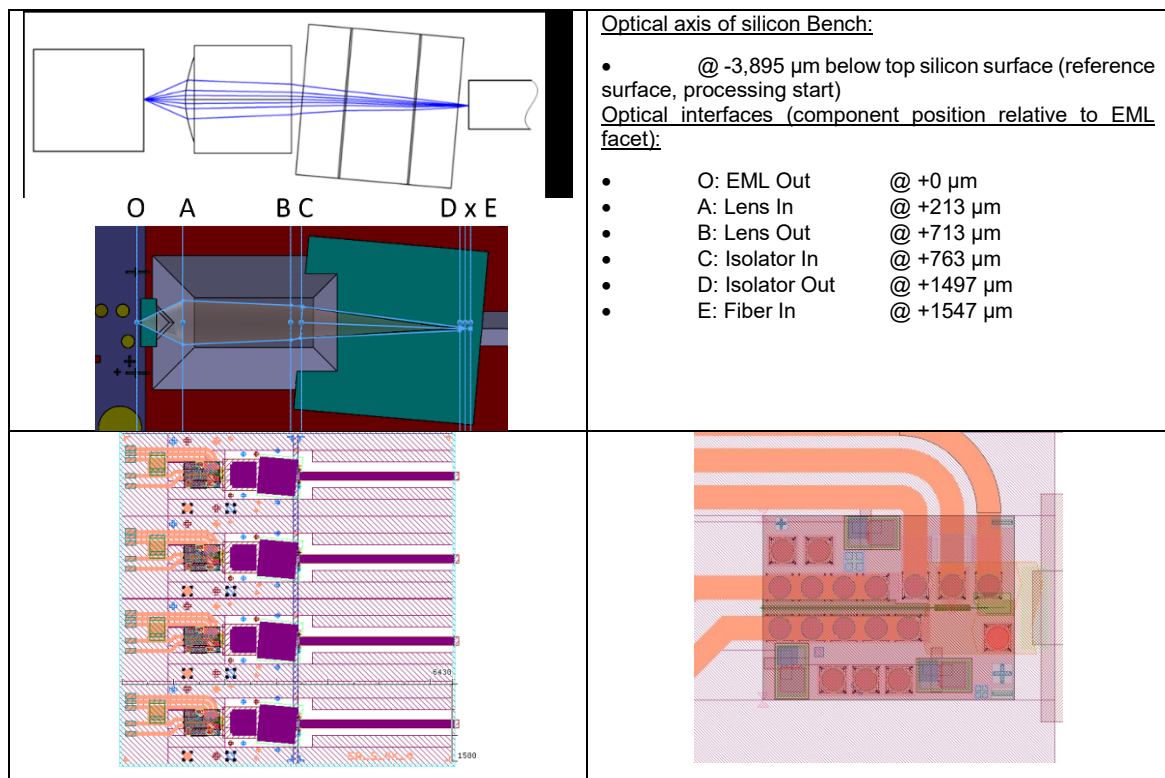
Pre-layout GDS of 4x Channel Silicon Bench for Assembly of single EML (solder self-Alignment, gold thermocompression @ IZM) and left, "TCB" (Thermocompression Bonding @ BESl) and respective view on EML and HF routing, left solder self-alignment with stoppers, right, TCB (HF-routing to be still implemented)
